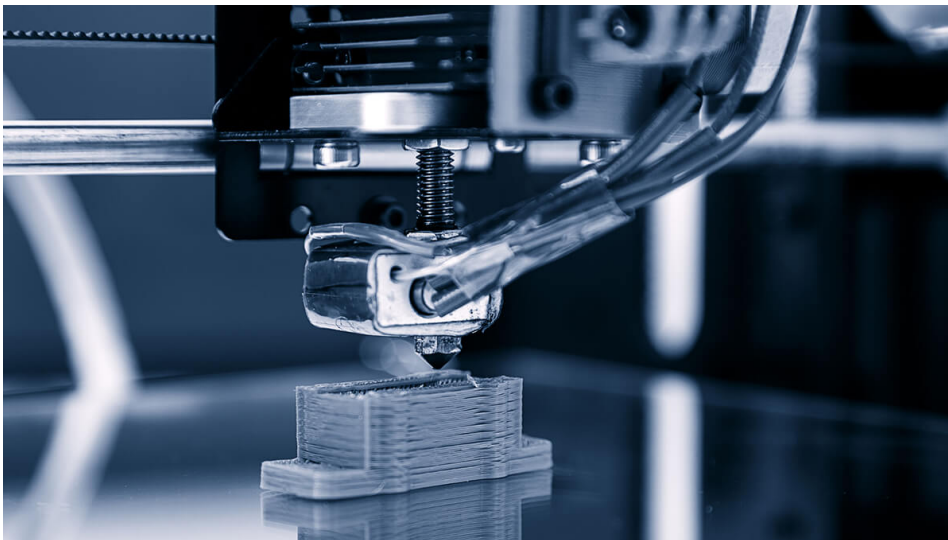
A 3-axis FDM-printer fabricating a part [28]
